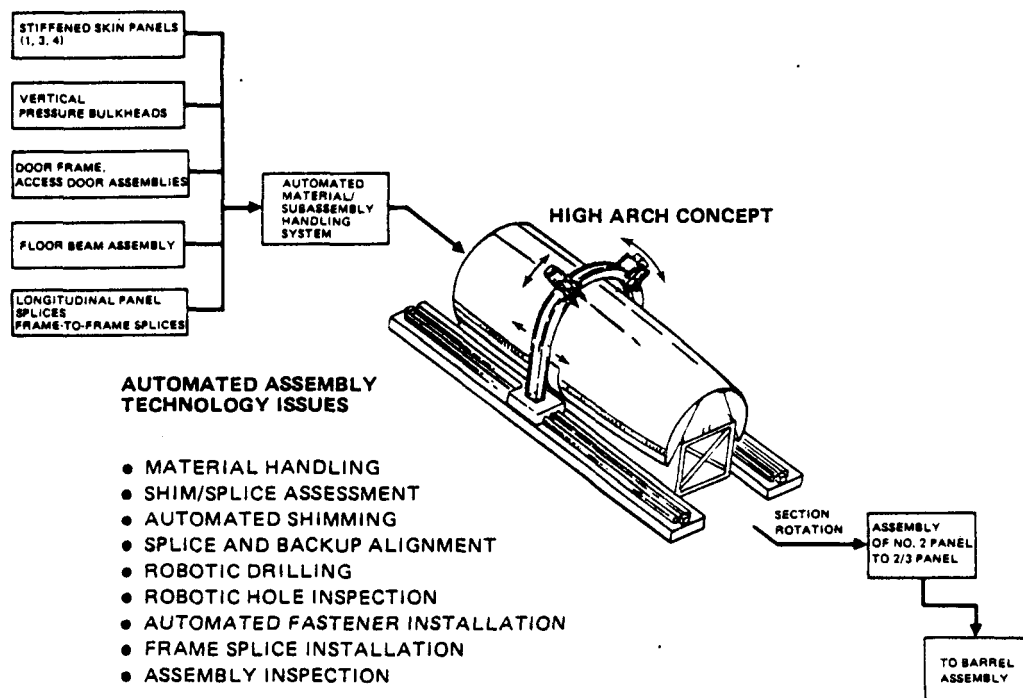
TECHNOLOGY ISSUE – AUTOMATED ASSEMBLY
